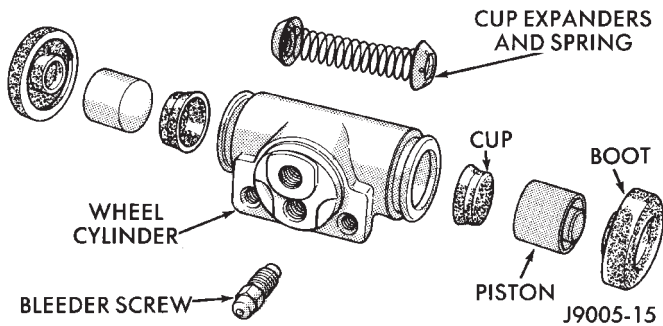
Wheel Cylinder (9-Inch Brake)
